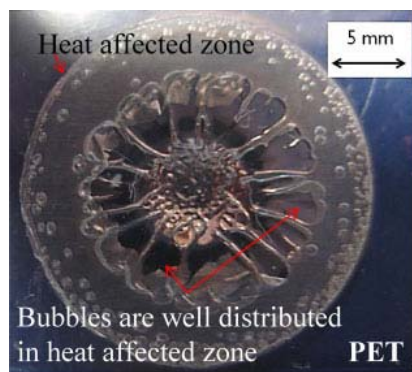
Fracture surface of an A5052/PET specimen, showing the bubbles formed in the plastic material [64].
